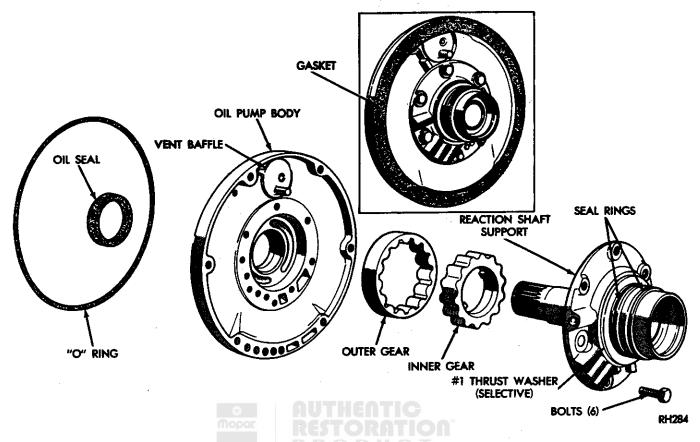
Oil Pump And Reaction Shaft Support Components—A-727
